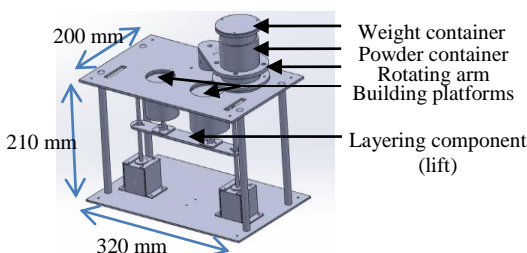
Isometric view of the prototype assembly for layer-wise deposition study.
